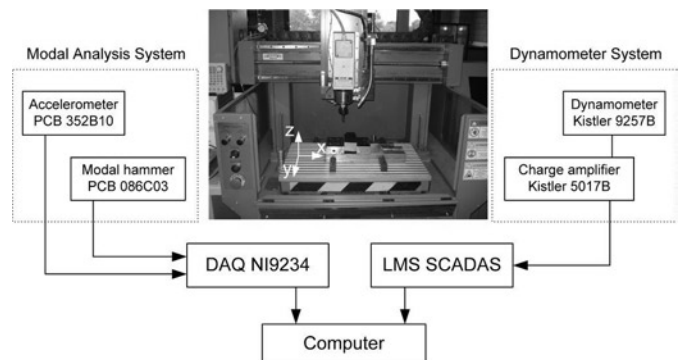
Experimental setup of CNC milling machine with acquisition system scheme
